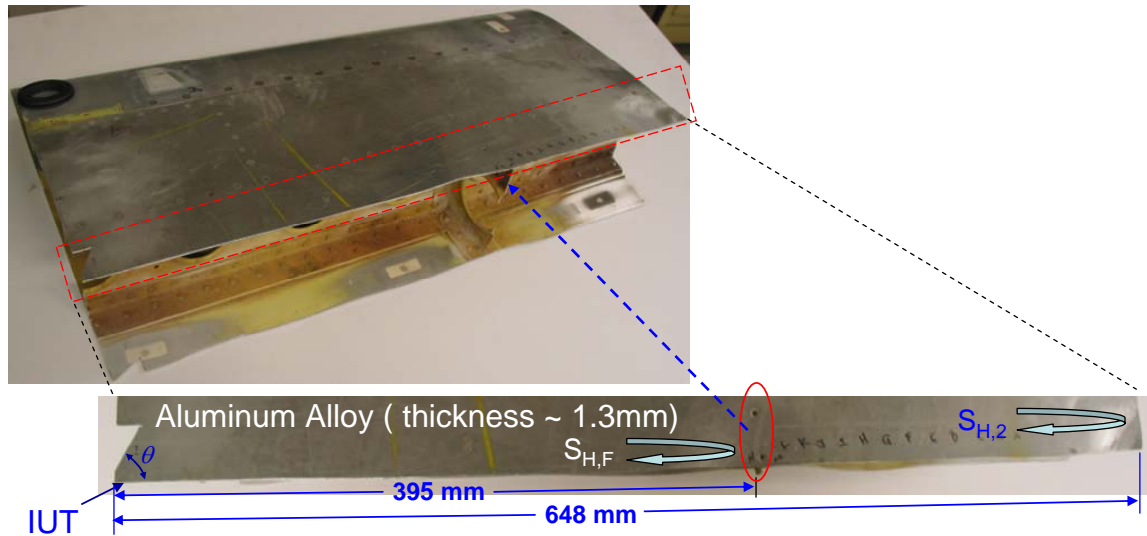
One IUT coated directly onto the side surface near the end edge of an Al horizontal stabilizer with an angle θ of 61.7° to generate and receive SH PAW using mode conversion. $S_{H,F}$ is SH PAW reflected from the location with a line-shape bolted joint underneath the frame, and $S_{H,2}$ is that reflected from the end of the frame.
